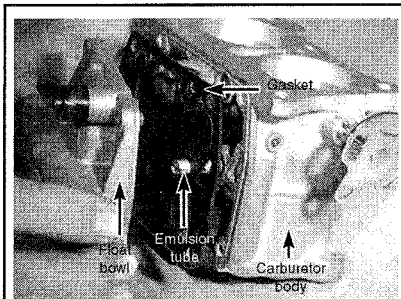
Install a new float bowl gasket making sure all holes in the gasket are aligned with carb body passages
